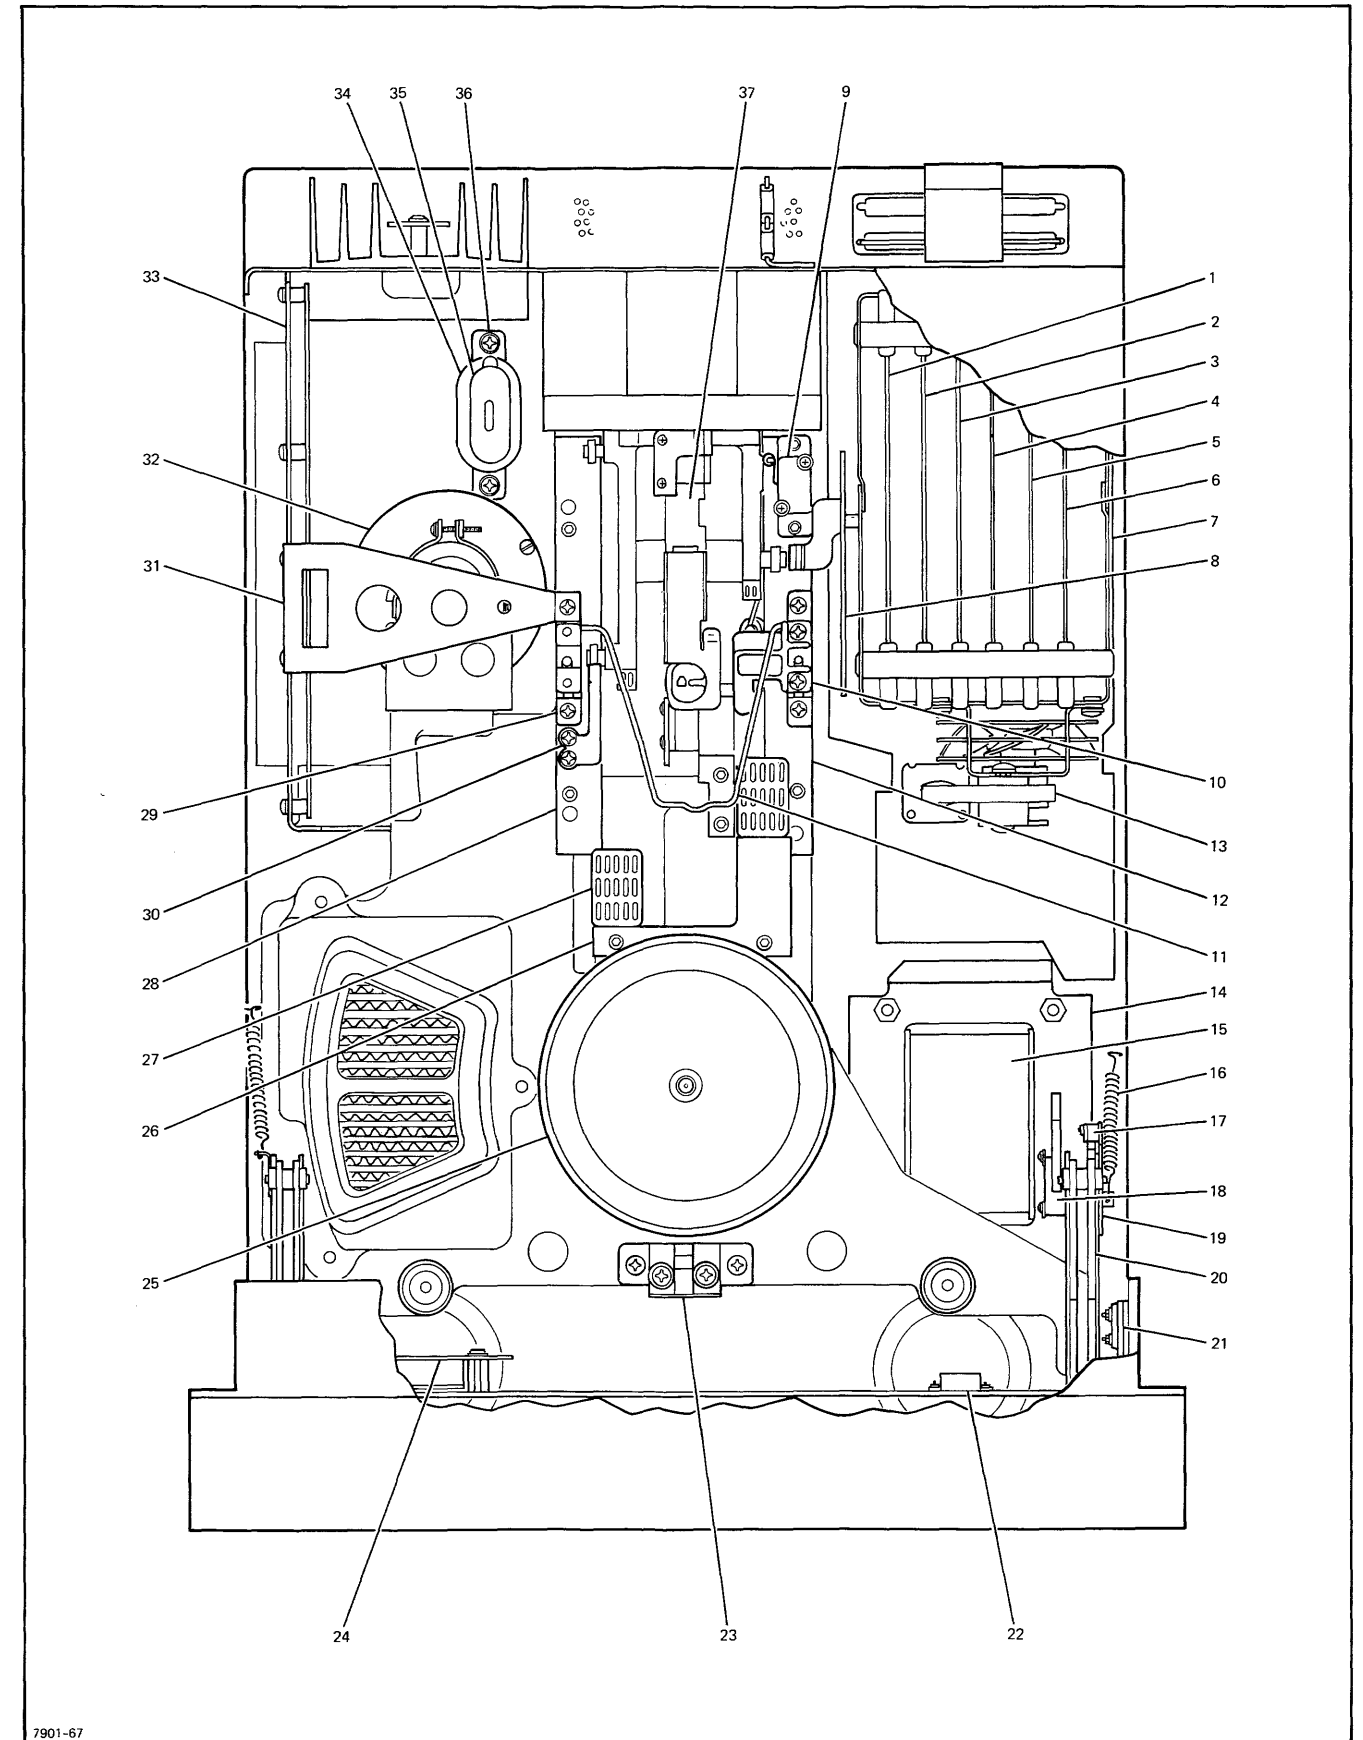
Upper Deck Assembly, Parts Location Diagram
